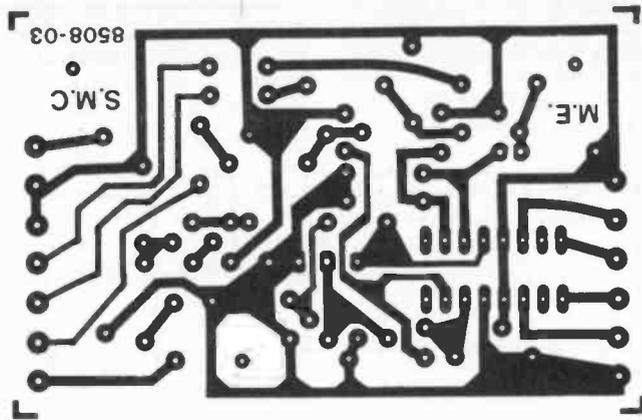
P.c.b. design for the Stepper Motor Interface.
